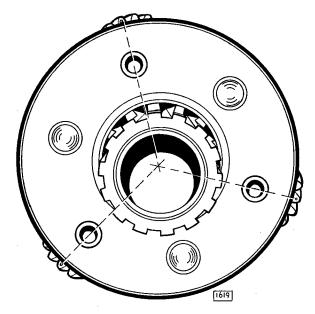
Assembly of the planet gears—note the positions of the marked teeth.
